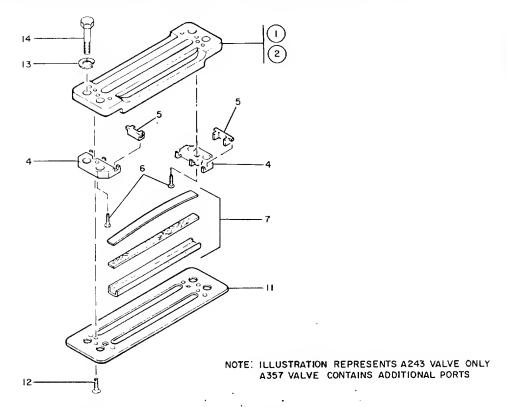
DISCHARGE VALVE [A243-A357] (A243 Used on 6 x 5 and 7 x 5; A357 Used on 8 x 5 and 8 x 7)
